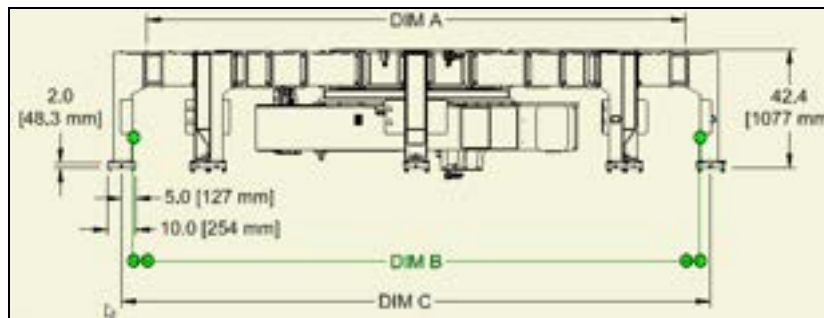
OD CHUCKING LEG DIMENSIONS
